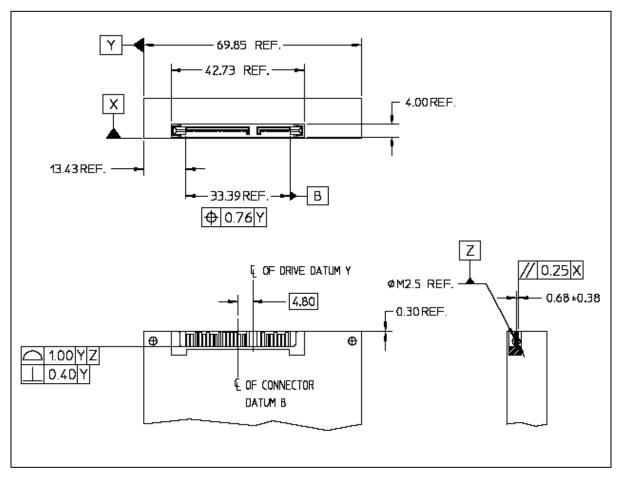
Device plug connector location on 1.8 inch side mounted device
